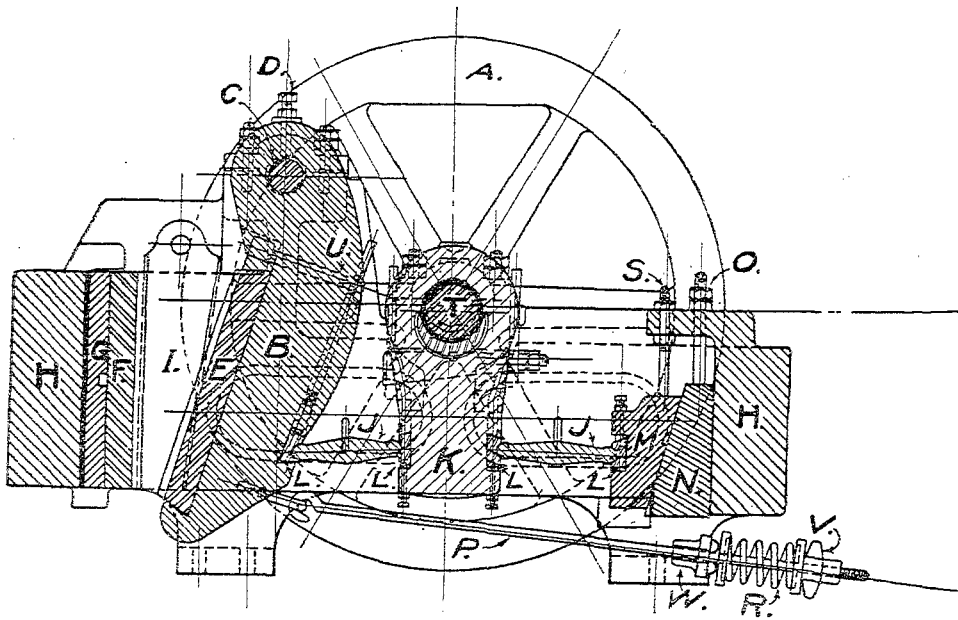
Sectional Elevation of the Blake Rock Crusher with Parts Indicated by Letters (after Chalmers & Williams)
